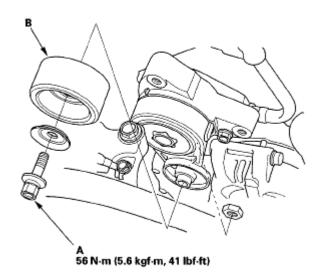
Identifying Pulley Bolt (With Torque Specifications)
